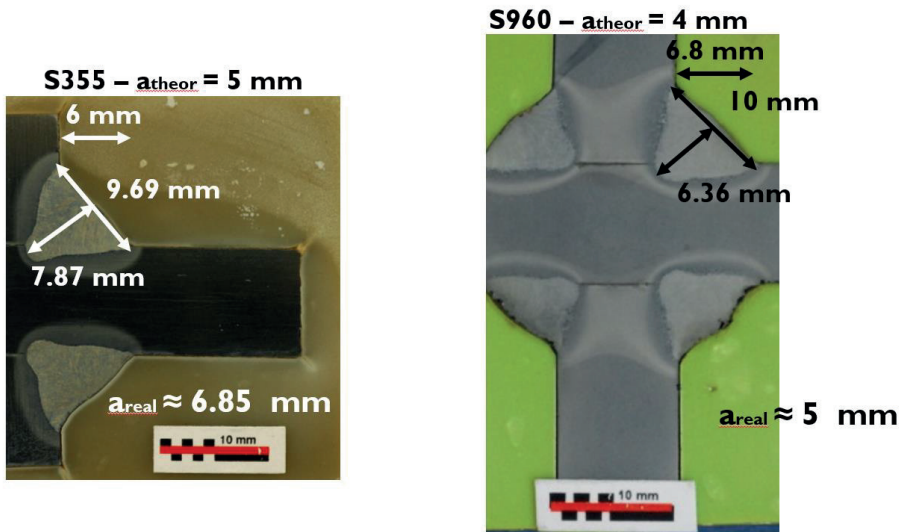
Macrosections of the investigated fillet welds taken by IWM [146] – Measurement of the weld pool size
